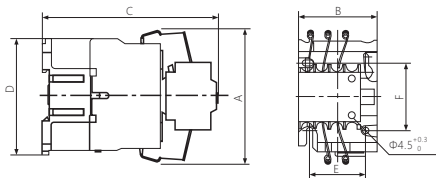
Outline and installation dimensions of CJ19-25~43 contactors
